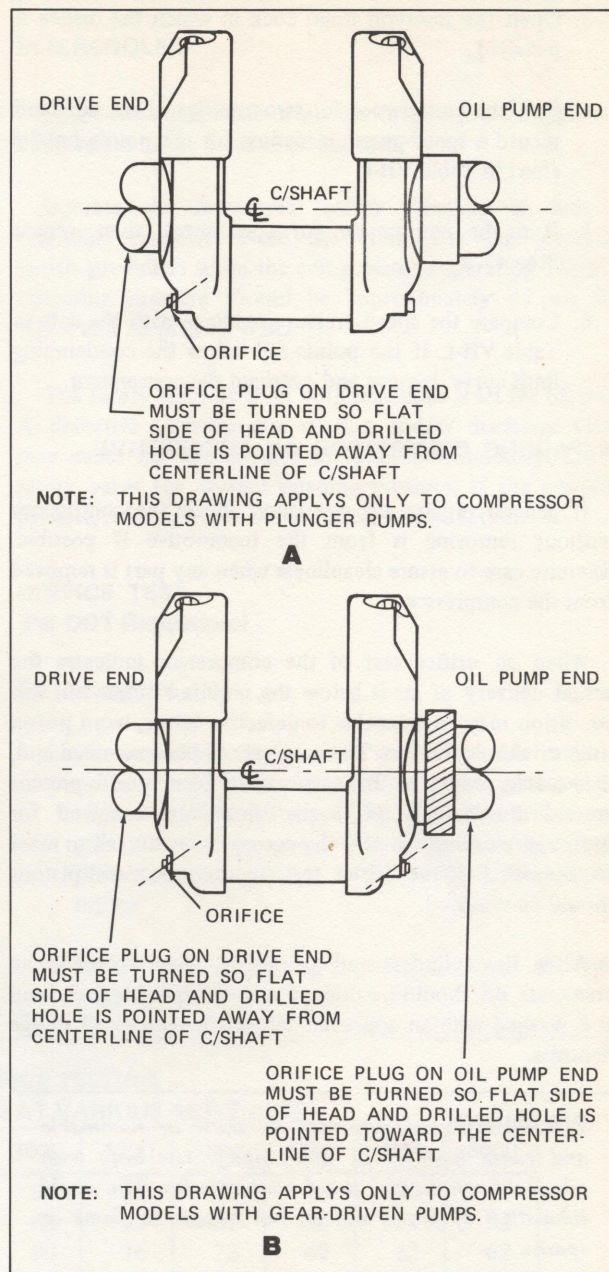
CRANKSHAFT ORIFICE PLUG ARRANGEMENT.
